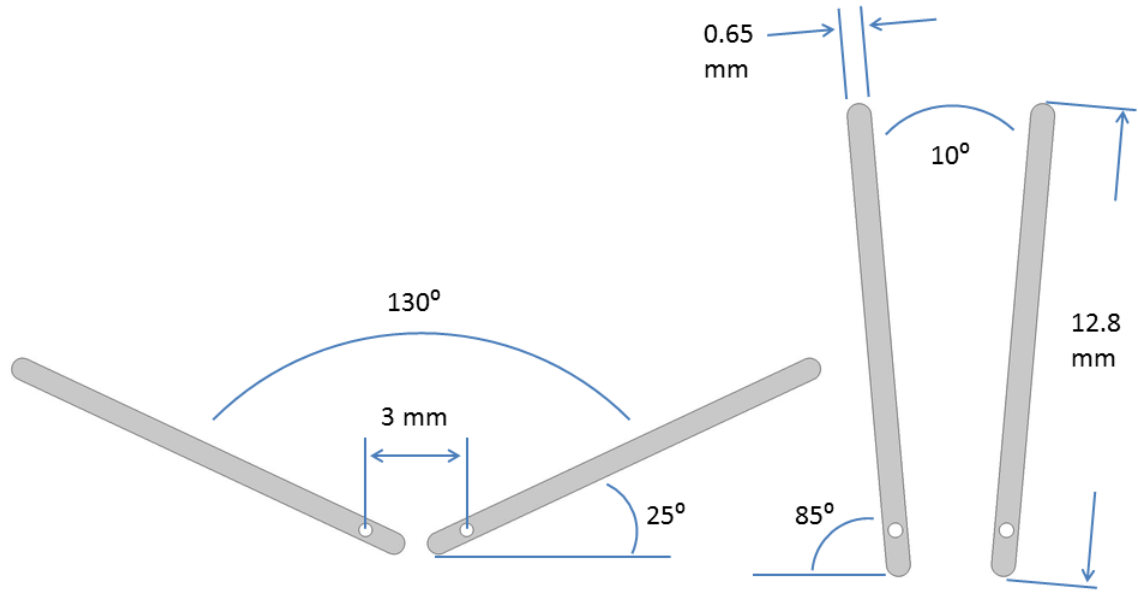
Schematic Drawing of Butterfly Hinge (Left) and Pin Hinge (Right)
